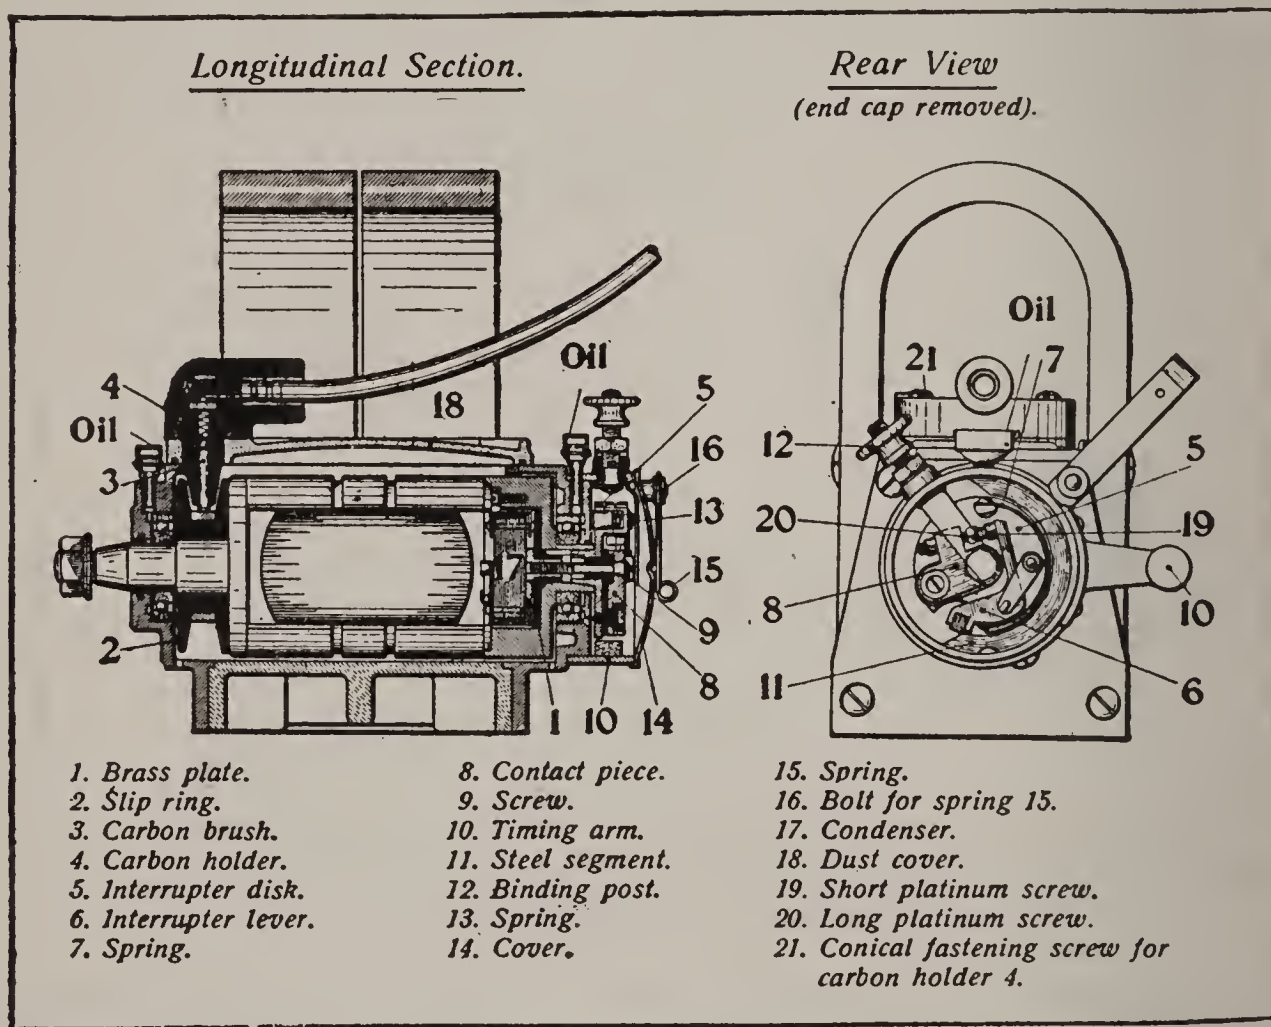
Longitudinal Section and Rear View of Bosch Motorcycle Magneto.
